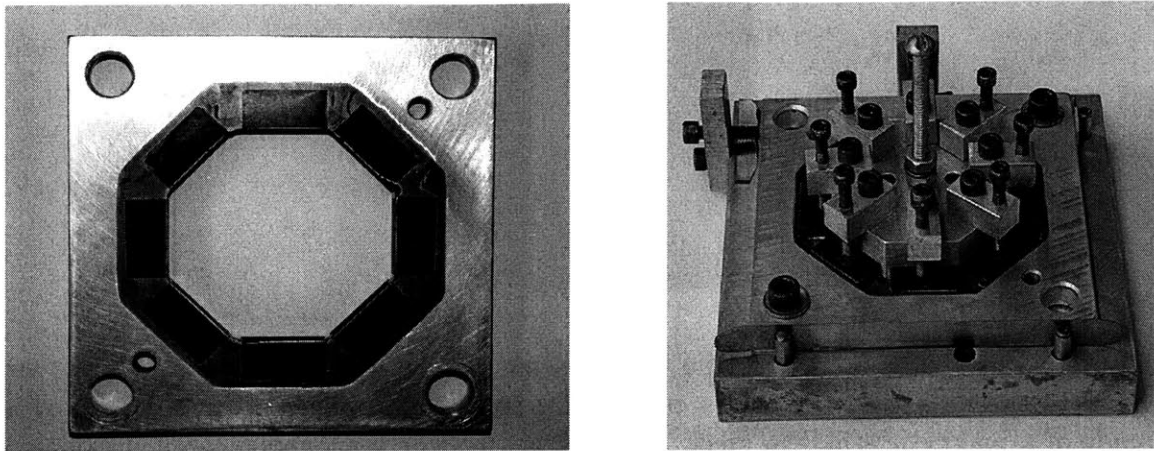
On the left is an exterior octagonal ring magnet for a tubular linear motor. On the right is the fixture used to assemble the magnets. Pictures taken by Michael Berhan [5].
